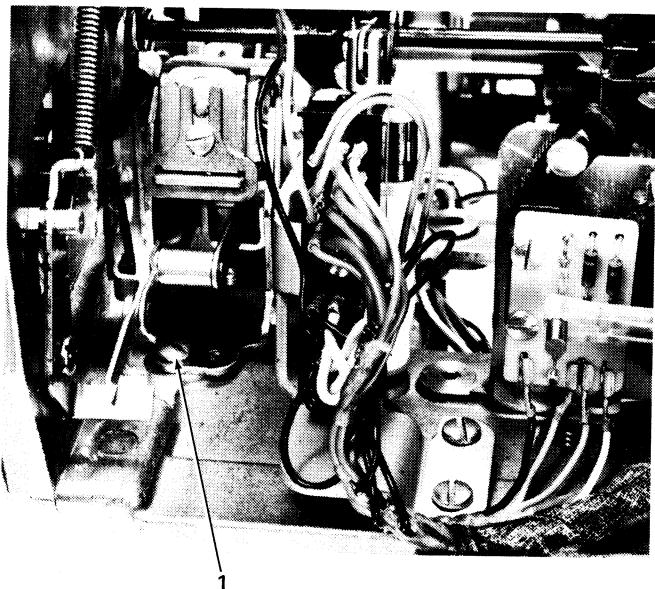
Index Magnet Assembly Removal (Rear of Printer)
